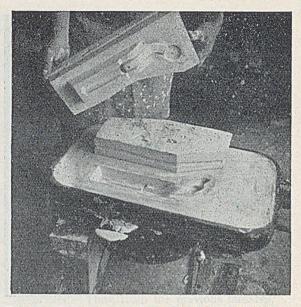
First Half-mould turned over and touched-up where necessary. Next, the other individual moulds are placed into position for Casting in Plaster, a Step-joint forming the Location.
